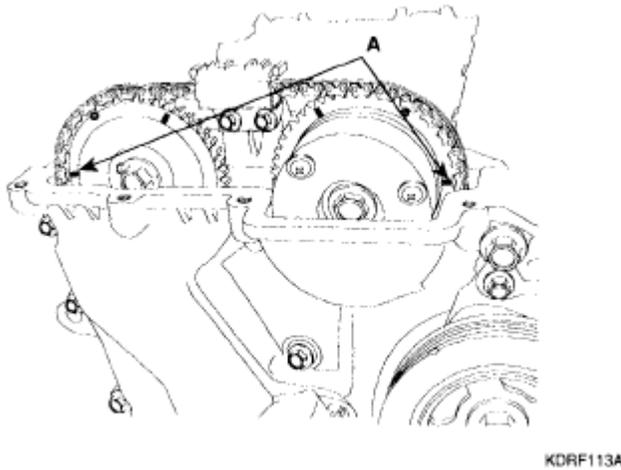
Locating Mark Of Camshaft Timing Sprockets
